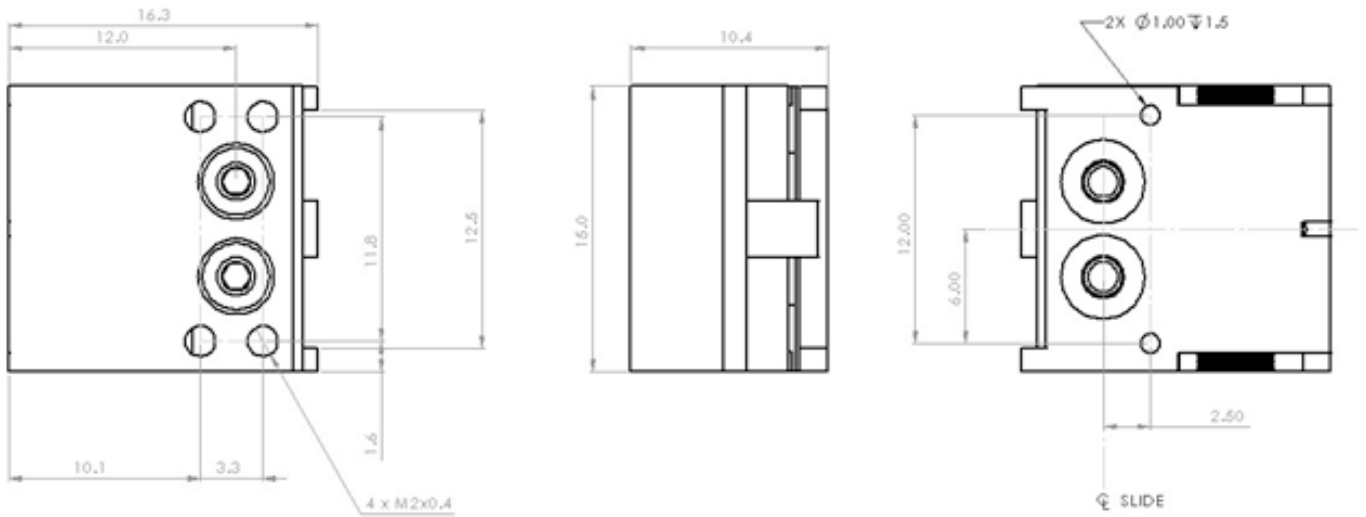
Mechanical Drawings of LAS Series linear motors with factory-installed integrated encoder
